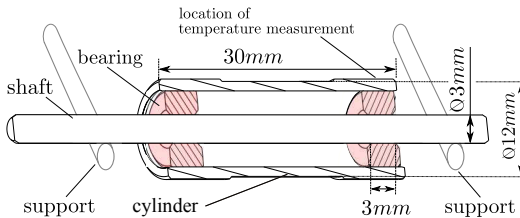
Cross section of the bearings pressed in a steel cylinder and rotating shaft.
